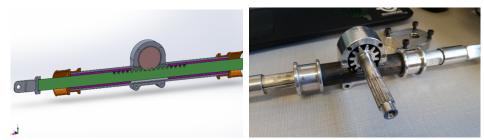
SOLIDWORKS CAD file for current Baja rack and pinion (left) and Formula SAE's senior project rack and pinion steering assembly.
